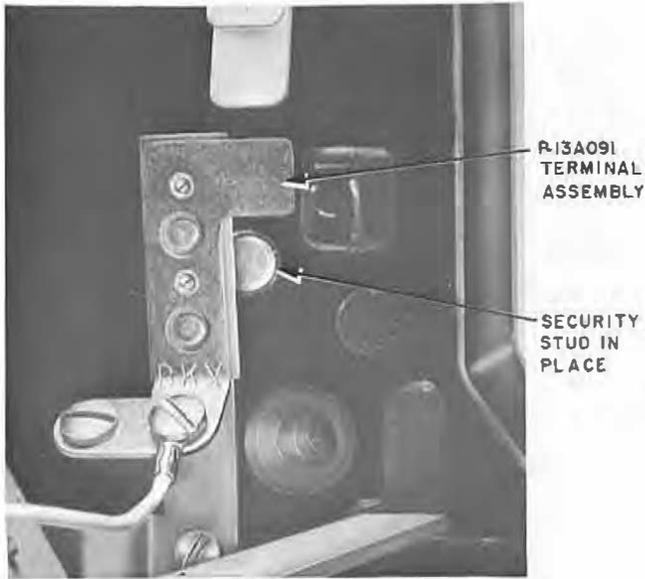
Terminal Assembly, Bolt Fastener, and Insulator
